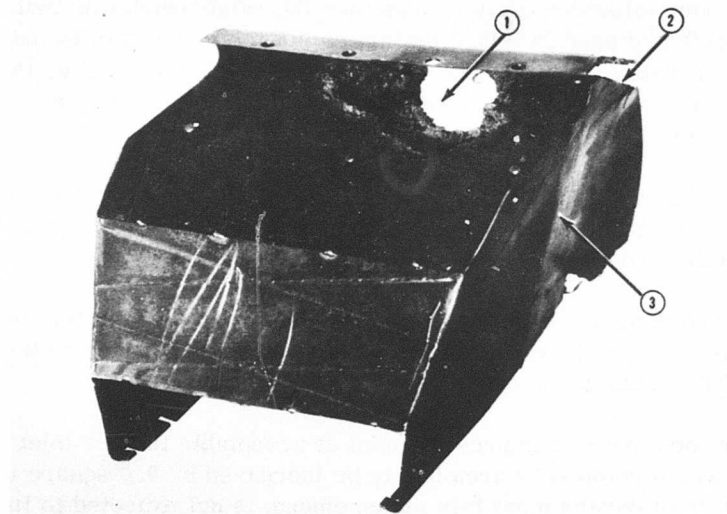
Rear View of Burned Outer Matrix Package: (1) Burned Screen, (2) Broken Weld, (3) Buckled Side Plate.
